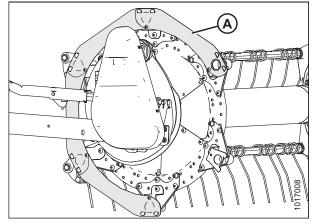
Partially Installed Reel Endshield (Cam End Shown, Tail End Similar)
